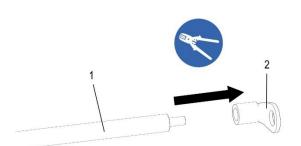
Crimp equipotential bonding cable with crimping cable lug
